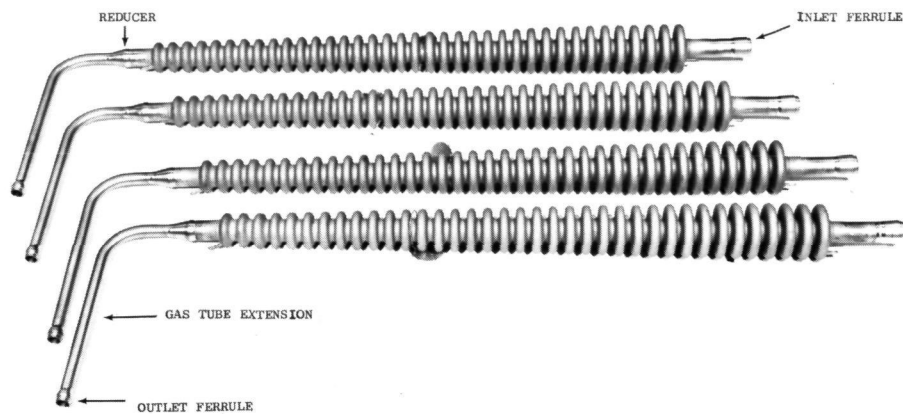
Typical Heat Storage Tube Assemblies. (P69-9-17F)
